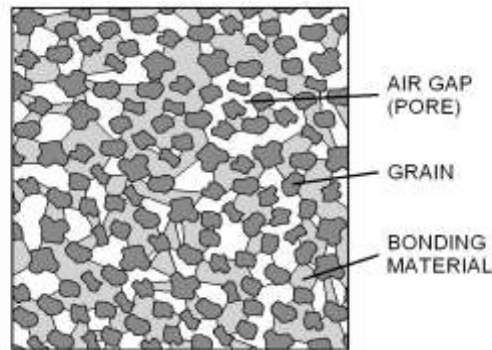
Detail of grinding wheel cross-section showing various structural components.
